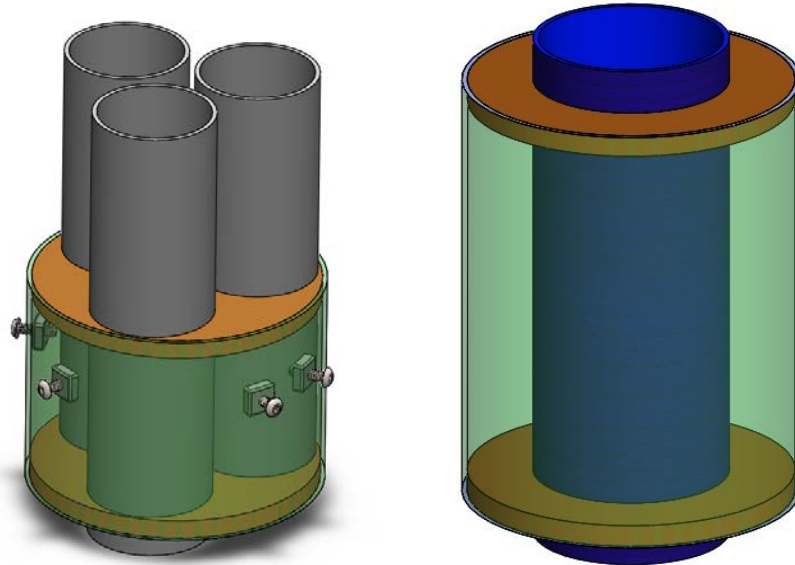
Model of the removable motor mount assembly with three motor tubes (left) and a single motor tube (right).
